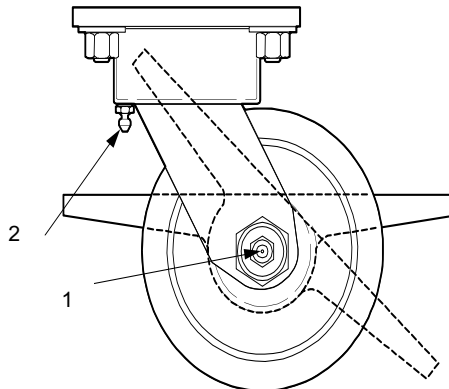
Lubricating the Swivel Bearing and the Axle Fittings.
